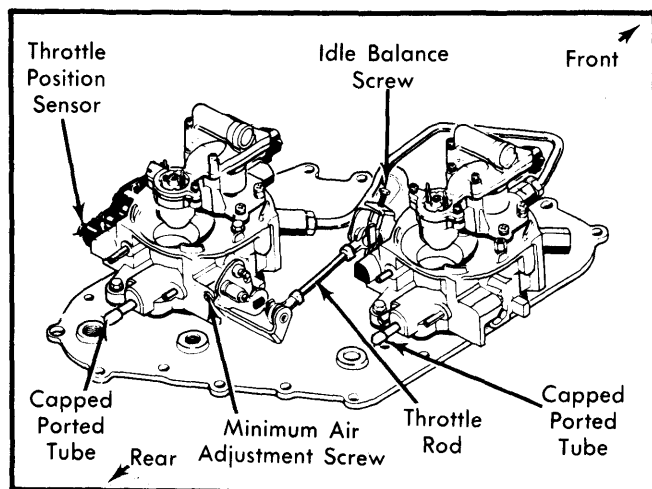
Component Location for 5.0L & 5.7L Fuel Injection System
